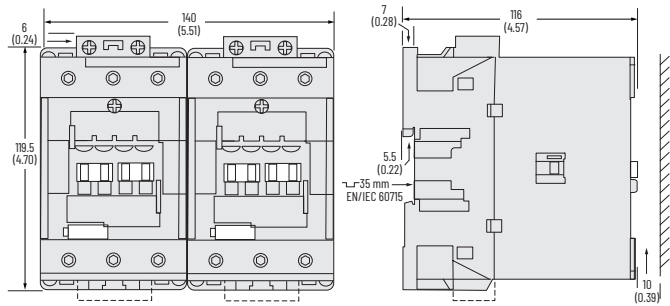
100-E80...100-E96 3-Pole Contactors with Side-mounted Auxiliary Contact
